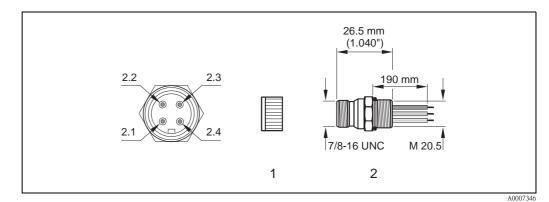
Connectors for connecting to the FOUNDATION Fieldbus
